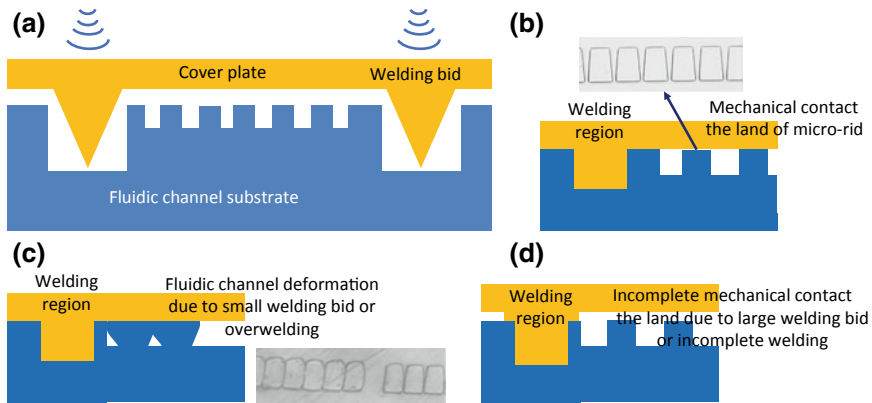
A design of fluidic channel platform with micro-ridge for ultrasonic welding and typical results depending on the welding bid design and process conditions
